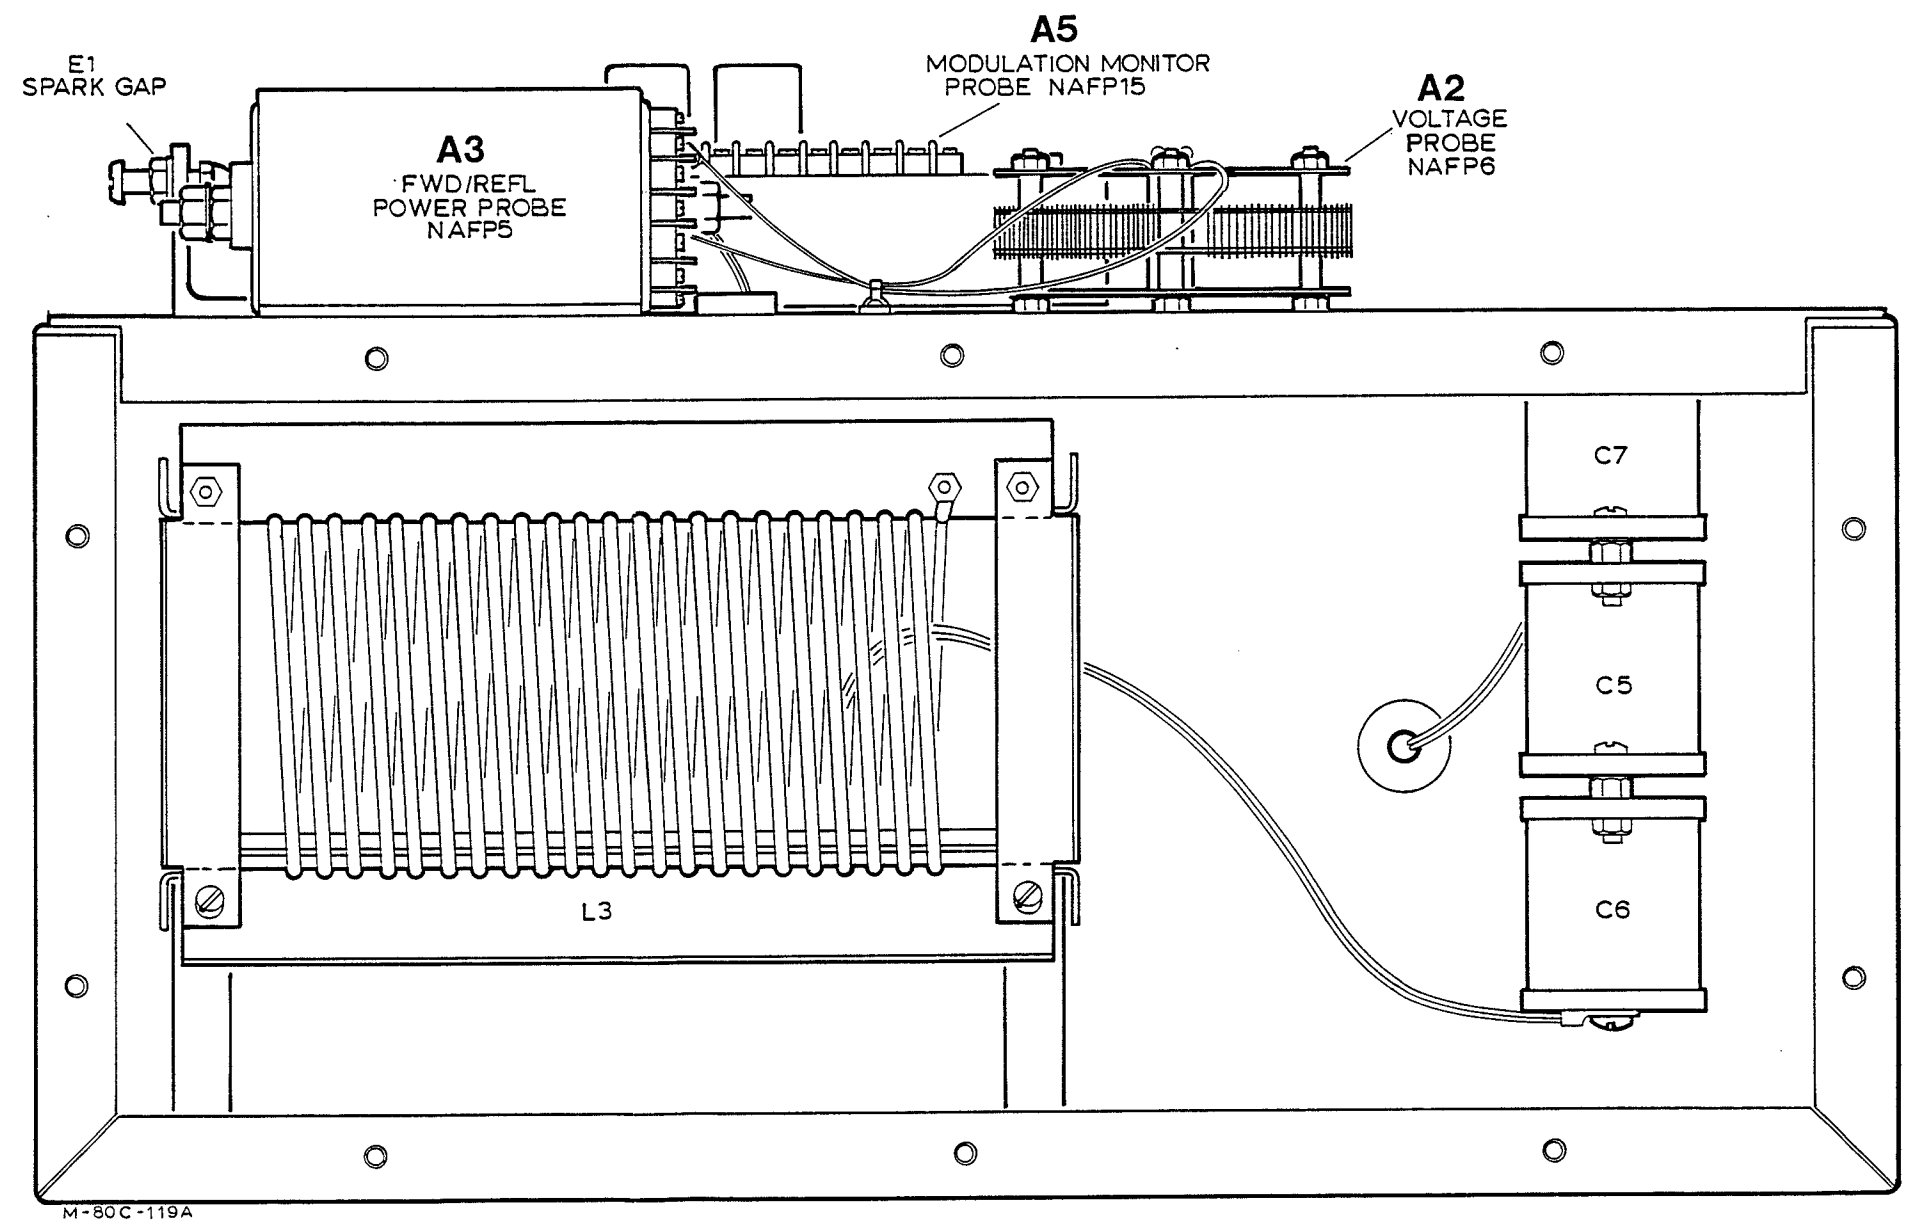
Assembly Detail - Harmonic Filter Assembly, Front View
